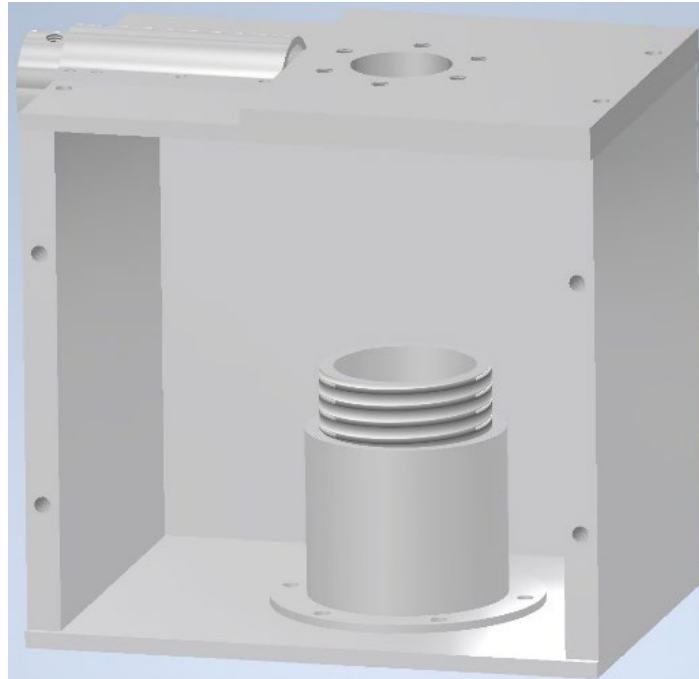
CAD design of the PMT Bucket that will house the beta monitor.
